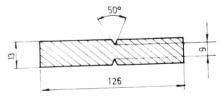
DCB fatique precracked specimen with smooth outer surfaces
